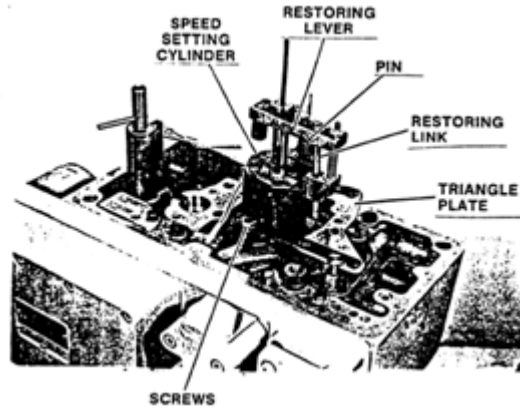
Triangular Plate and Speed Setting Cylinder Installed on Column
